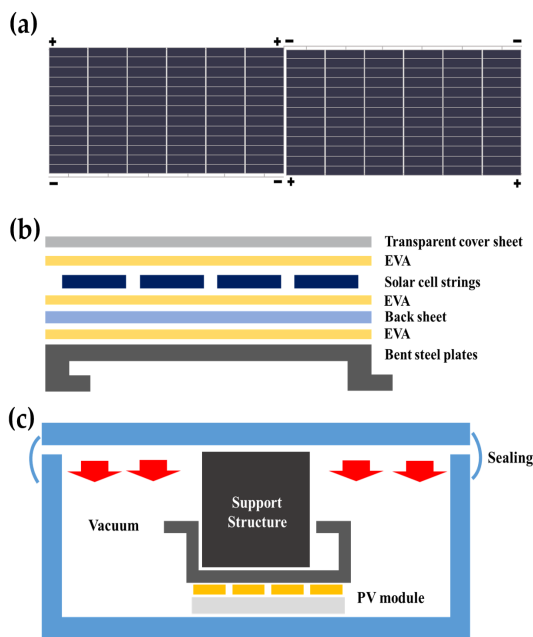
(a) String layout of shingled desing module. (b) Schematic of the shingled photovoltaic module with bent steel plate (c) Schematic of lamination process of photovoltaic module with bent steel plate
